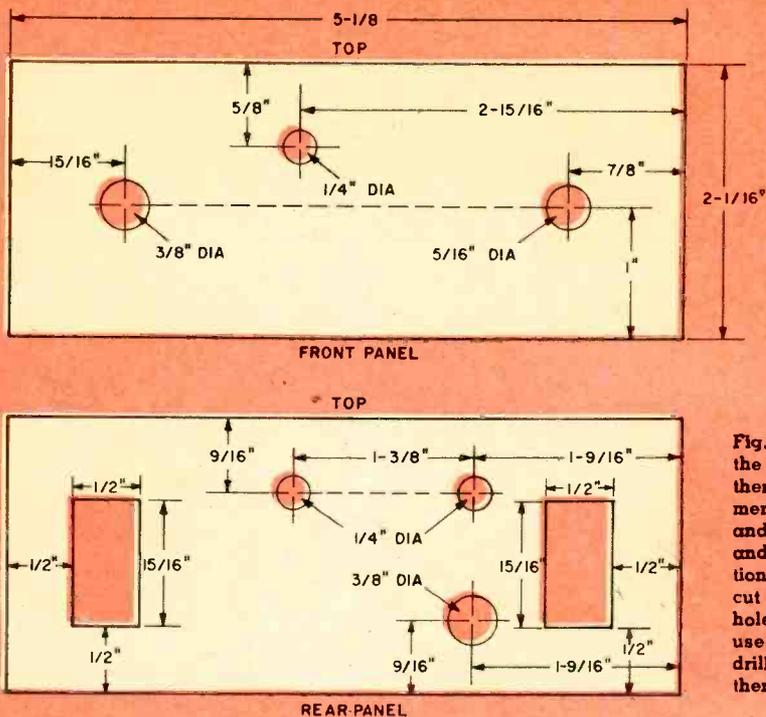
Position of all the parts is critical; therefore, use these dimensions for cutting and drilling the front and rear of the U-section of the Minibox. To cut the rectangular holes in the rear panel, use a nibbling tool or drill several small holes then file away metal.
